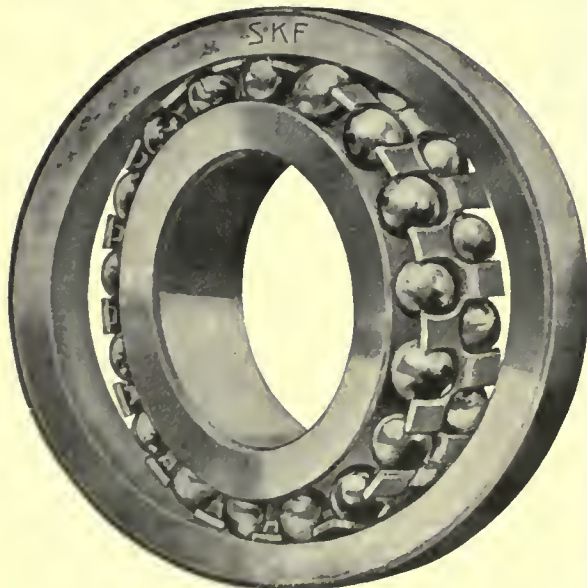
PERSPECTIVE VIEW OF SKEFKO RADIAL BEARING, ORDINARY TYPE.
